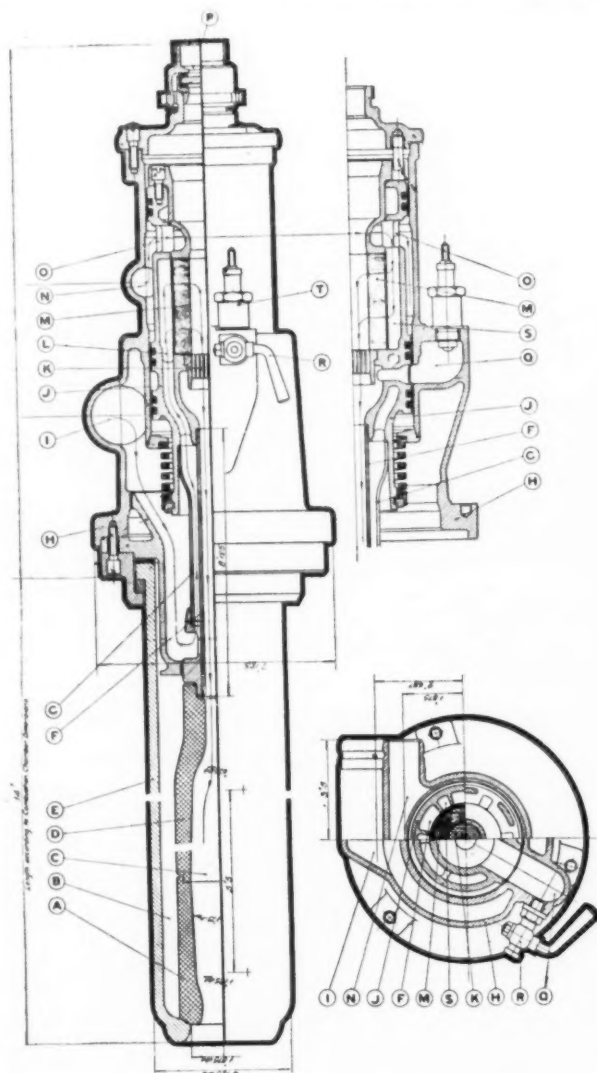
THE HAMMOND SUBMERGED-COMBUSTION BOILER
